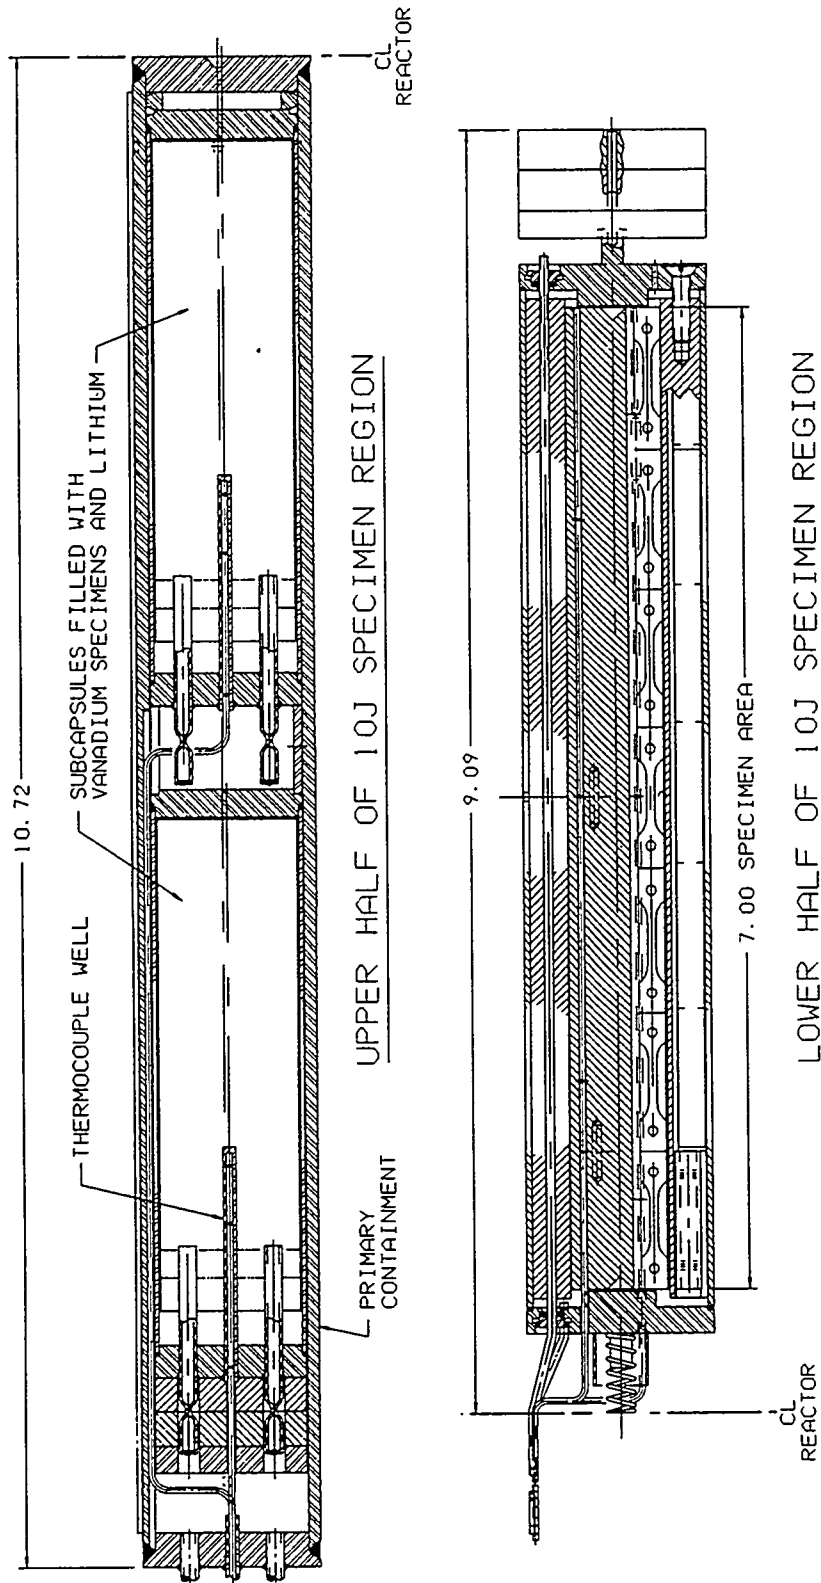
Upper and lower halves of the RB-10J specimen region. The upper half contains the primary containment vessel and two lithium filled subcapsules. The lower half contains steel specimens in a cylindrical aluminum block.
